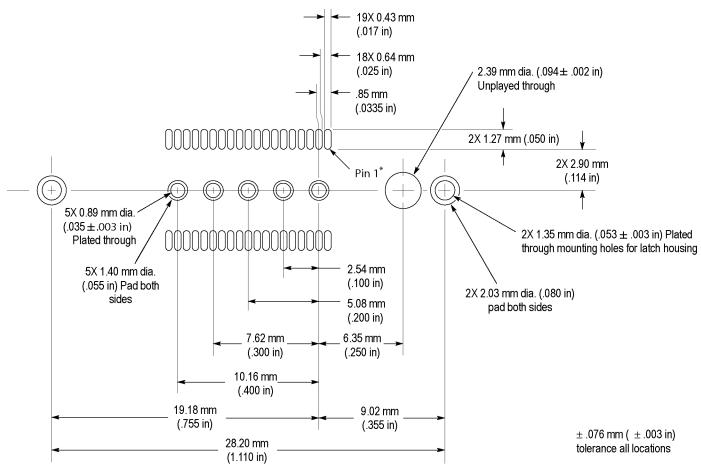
Dimensions and placement of a surface-mounted Mictor connector with latch housing
